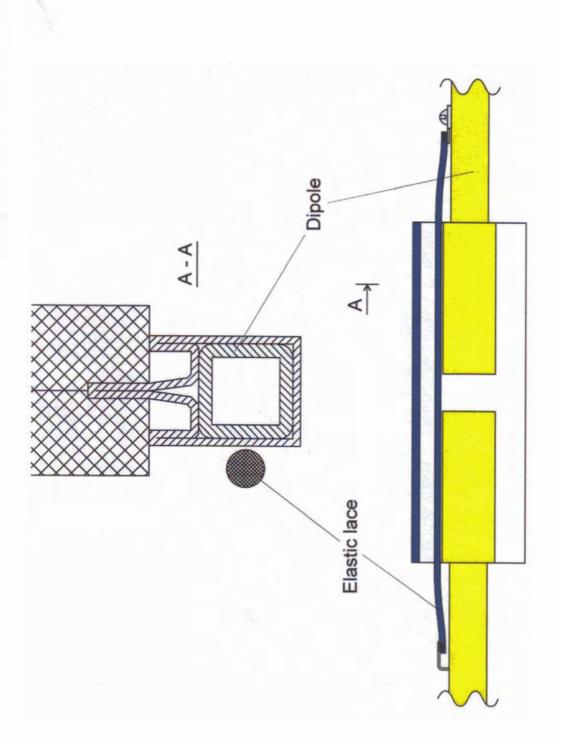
Attaching of dipoles to transmitter and receiver. Bottom view.
